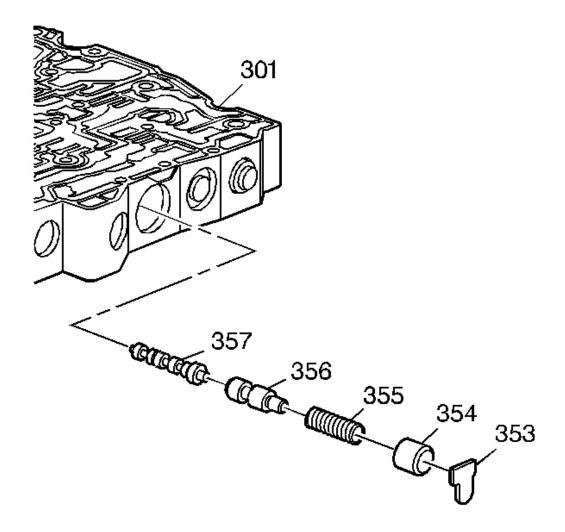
Identifying 3-2 Manual Downshift Valve & 2-3 Shift Valve Courtesy of GENERAL MOTORS CORP.
